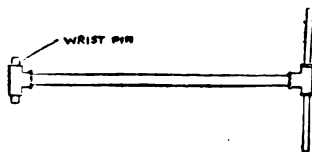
Another piston lapping handle: When it is desirable to lap a piston of a detachable-head engine without removing the cylinder casting, the tool shown is a time-saver. It is made of ordinary 1/2-inch pipe, a T at the lower end slipping over the wrist-pin of the piston. The wristpin used in lapping should be made of abre, as a metal one is likely to score the cylinders. Ground glass and crocus mixed in equal parts is used at the finish and ordinary valve grinding compound at the start.
